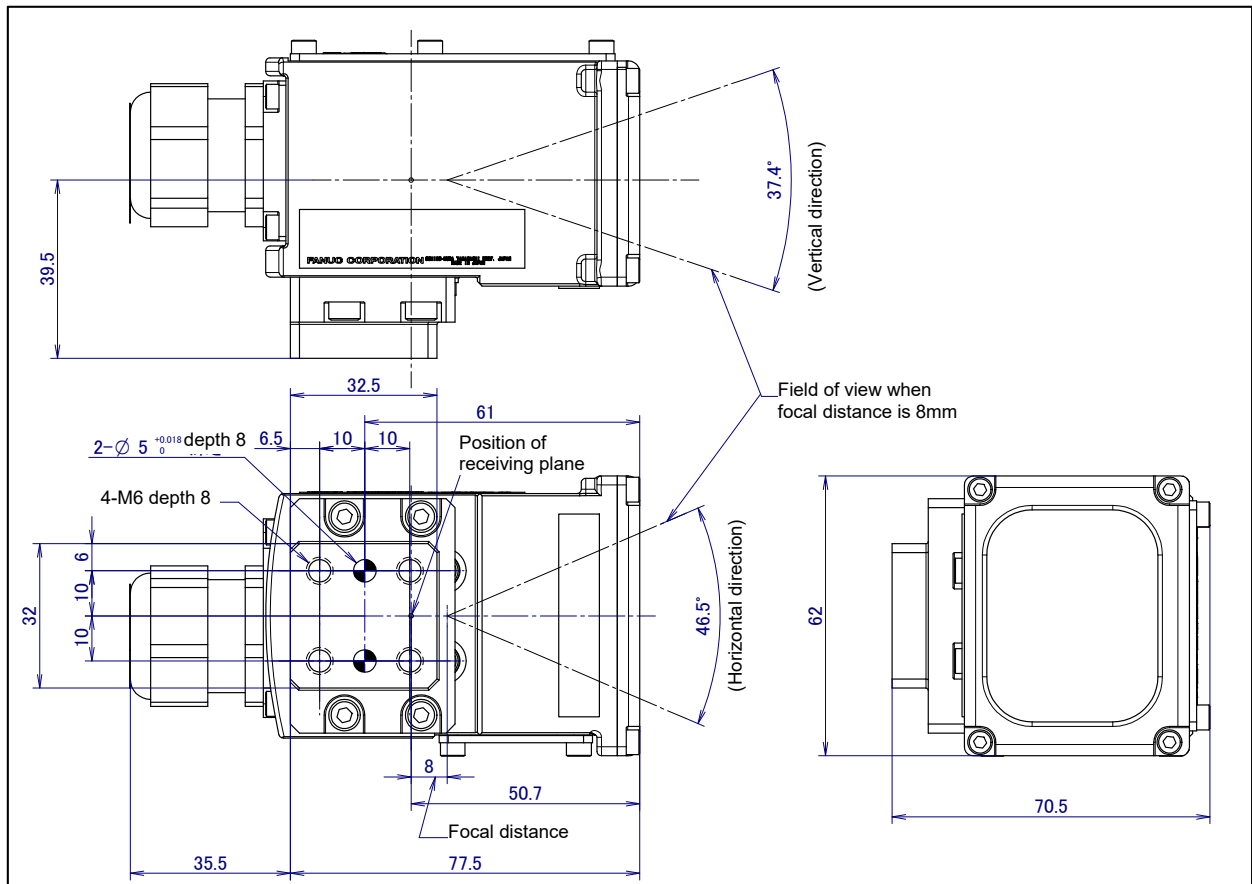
(b) External dimensions and vision range of sensor head of camera package (without LED light)
